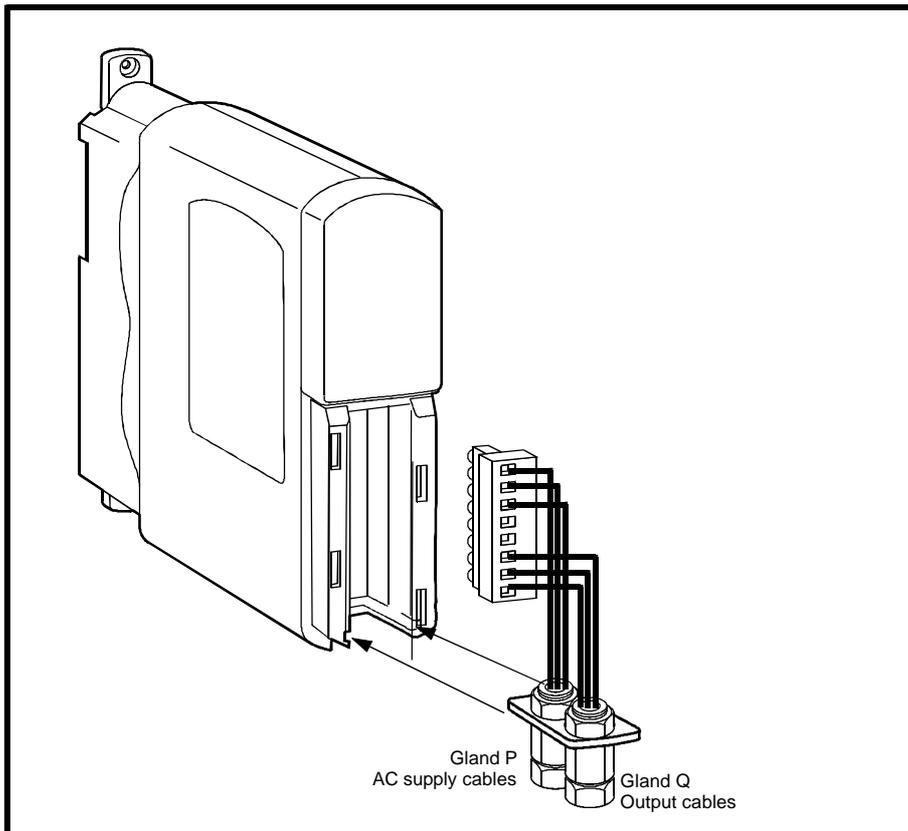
Completed cabling using gland plate and glands prior to insertion of gland plate and plug-in terminal block
